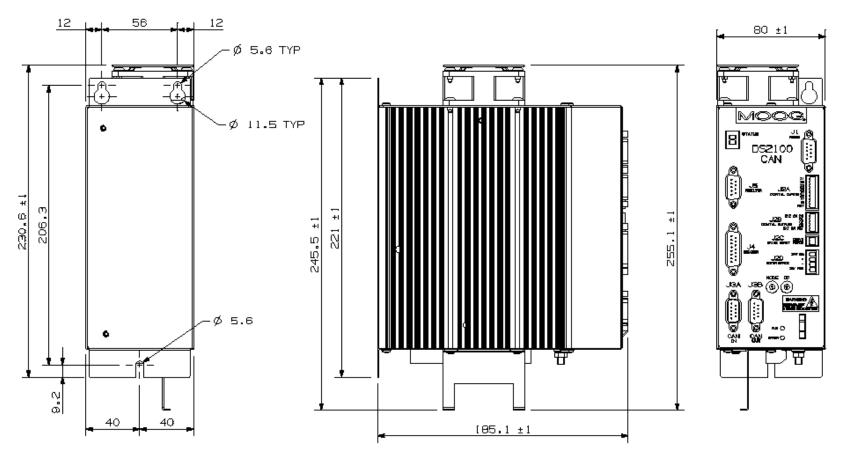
DS2100 μA Mechanical & Mounting Dimensions
